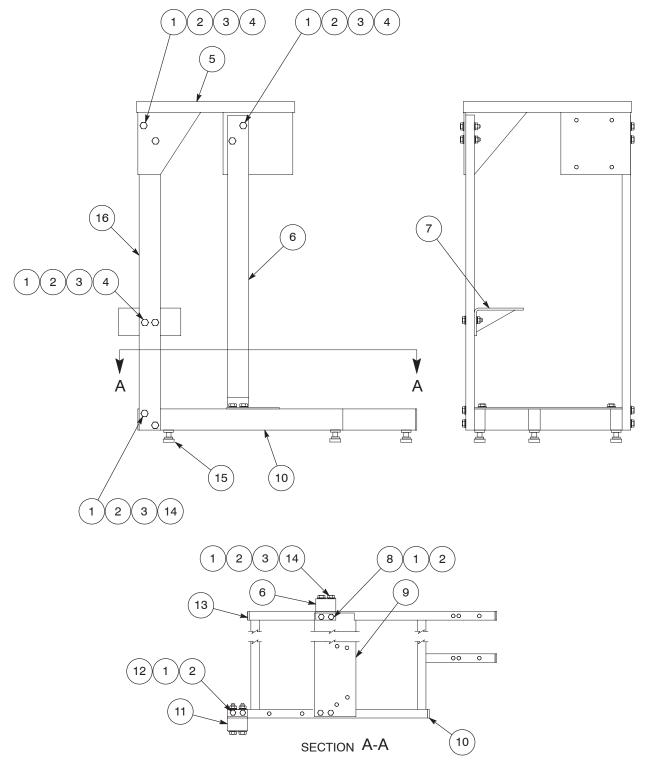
Frame assembly parts for Series 2300, FM-130, and Series 3000 units
